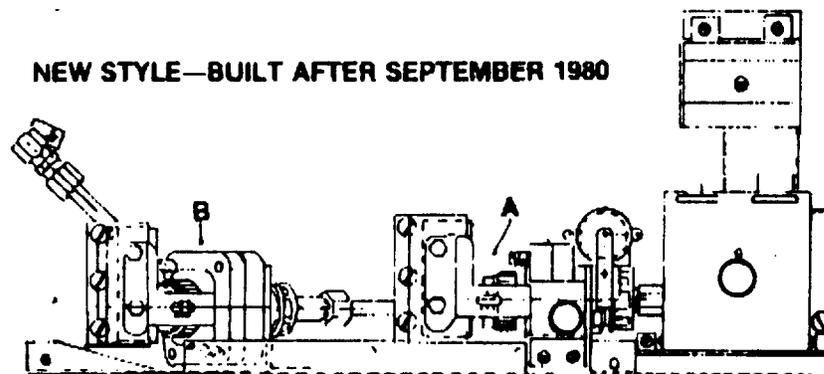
ELEMENT CONTROL SWITCH-NEW STYLE BUILT AFTER SEPT 1980
